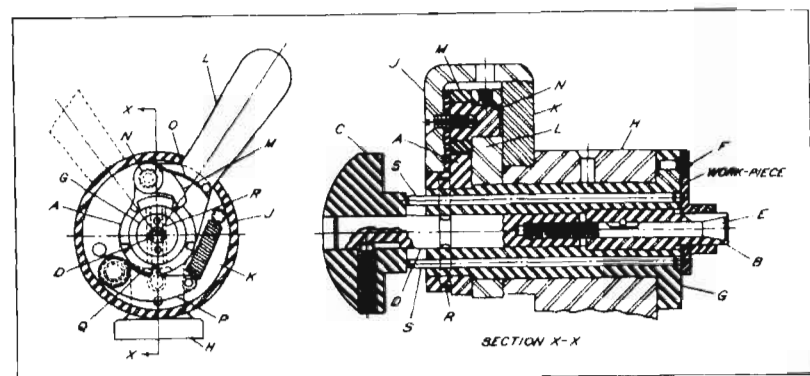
Indexing fixture functions around the action of a notched-plate type ratchet wheel and two pawls — one driving and one locking.
